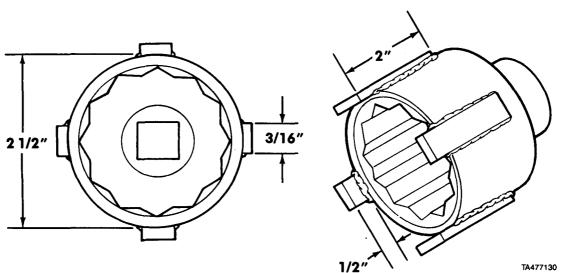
Air Compressor Cylinder Head Removal Tool (PN 2AH762).
